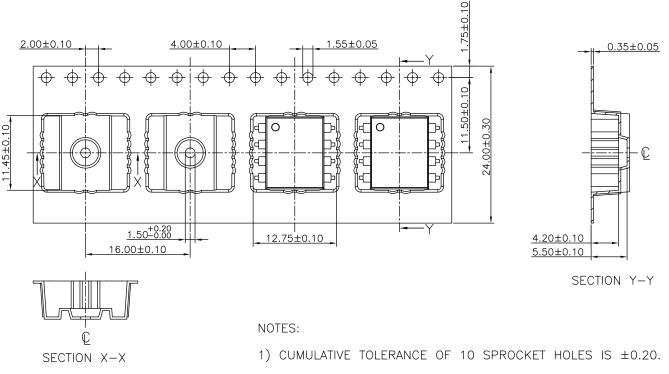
Tape and Reel Packing (750 parts per reel)
